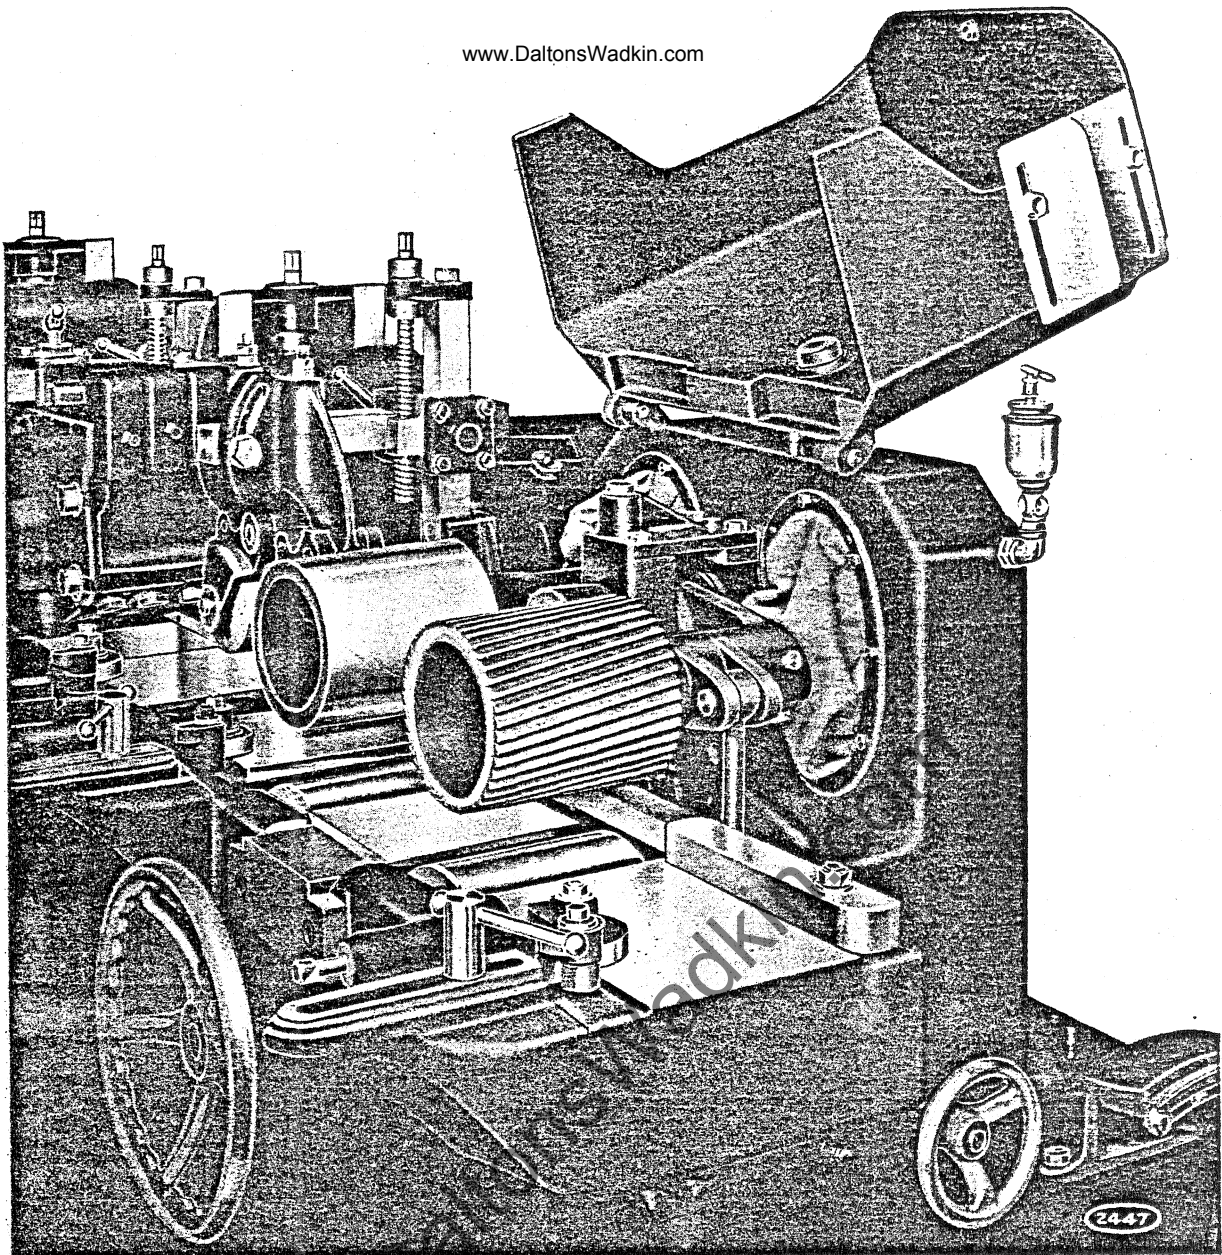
FEED-IN END OF MACHINE SHOWING FEED ROLLERS
